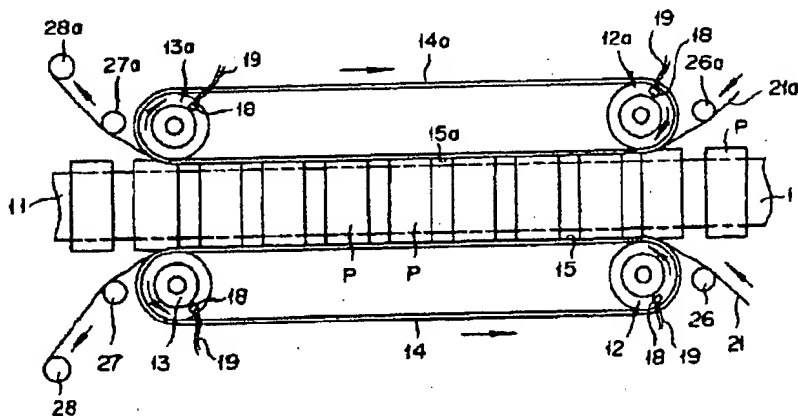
Sectional view showing continuous heater for fish-paste product relating to still another actual example of
